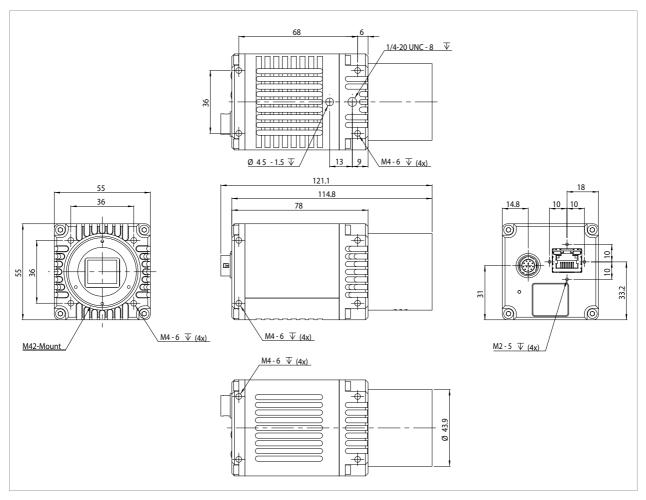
Goldeye G, dimensions with M42-Mount lens adapter
